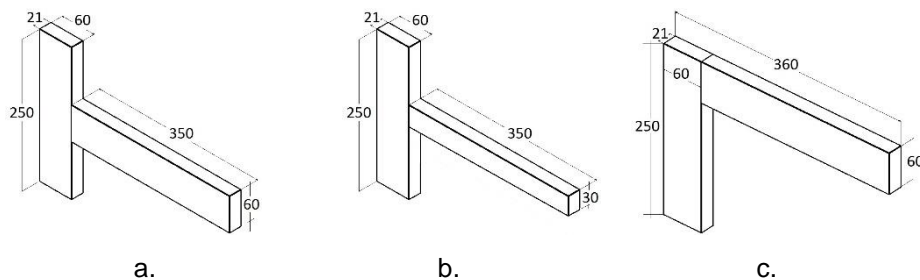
T-shaped (a, b) and L-shaped (c) specimens (measurements in mm)
